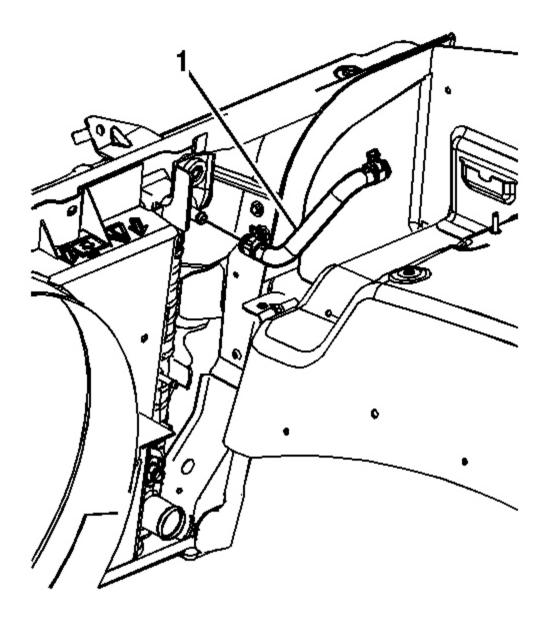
Surge Tank Hose & Radiator (Inlet) Courtesy of GENERAL MOTORS CORP.
